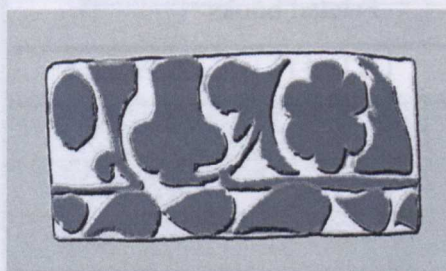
Hypothetical sketch of the cast wheel, producing the general shapes and outlines prior to being hand engraved.
